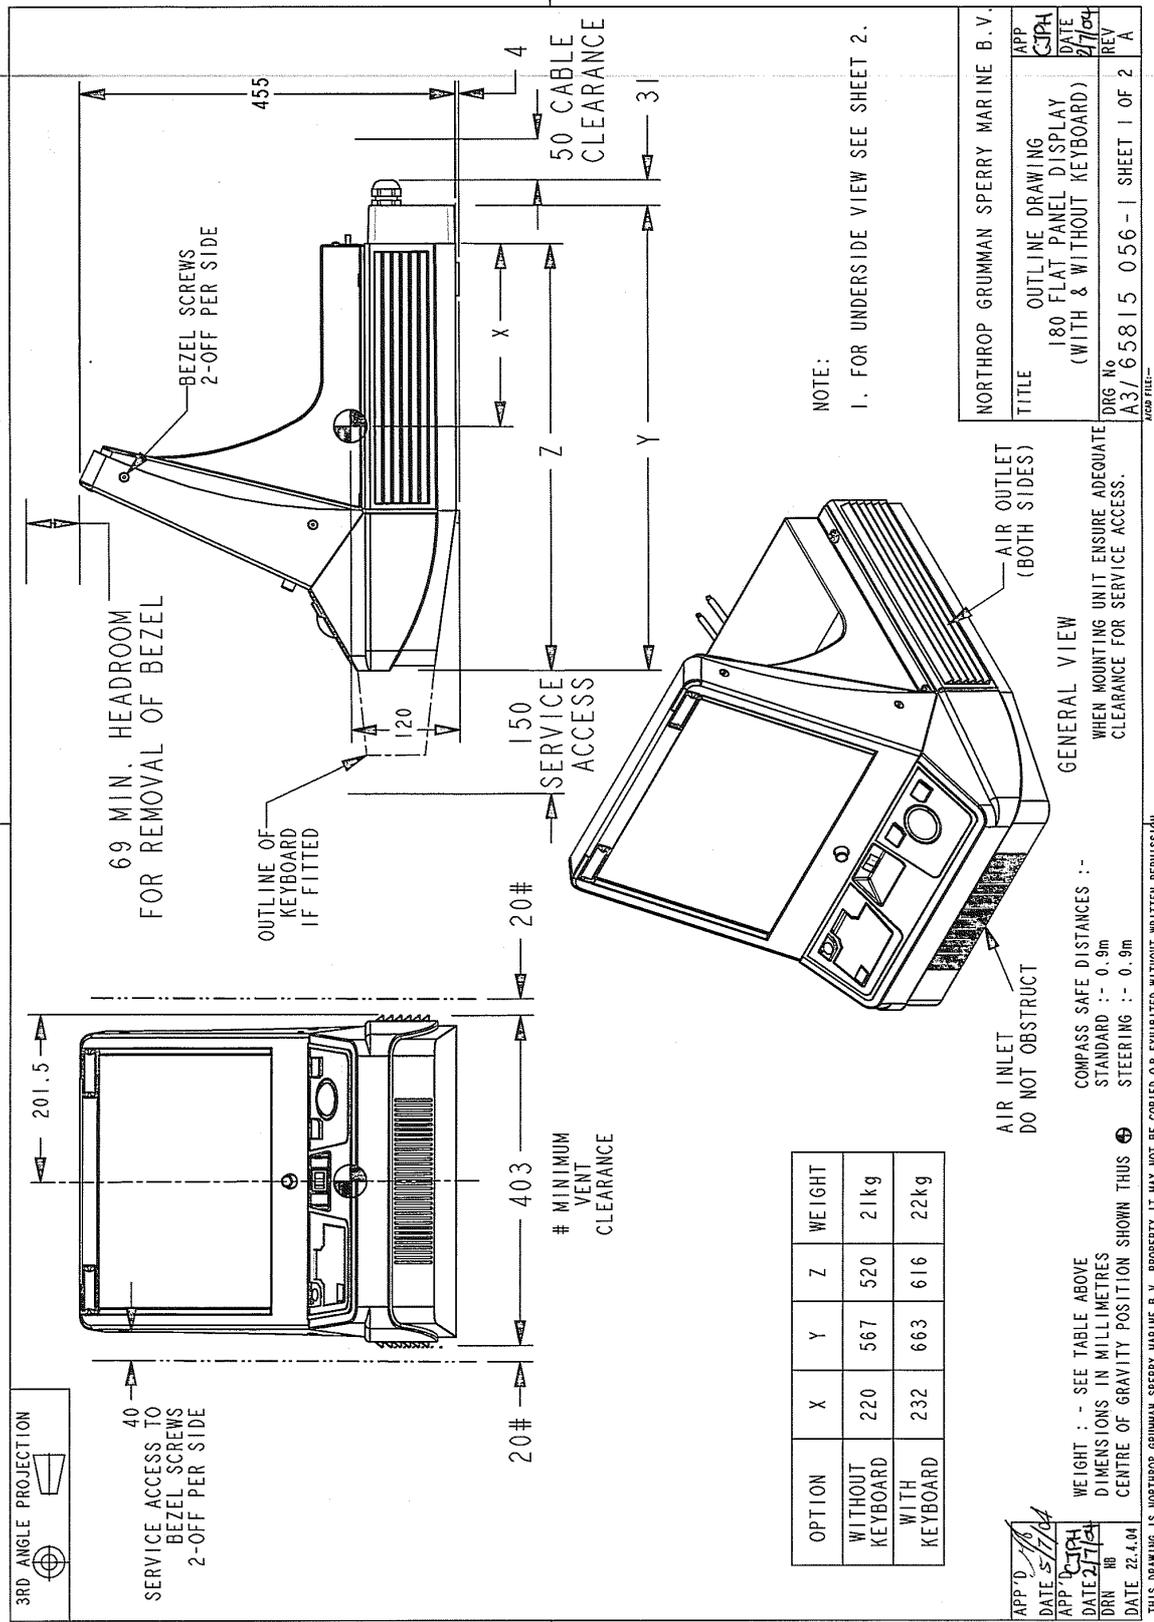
180 Display Unit (FPD) Outline Drawing
